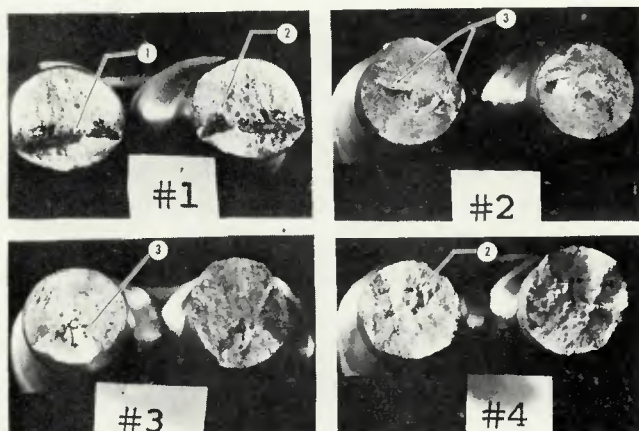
Fracture surfaces of tensile test specimens showing characteristic weld defects in aluminum gas metal arc weld with encircled numbers indicating following: 1—inadequate joint penetration; 2—porosity; 3—incomplete fusion
